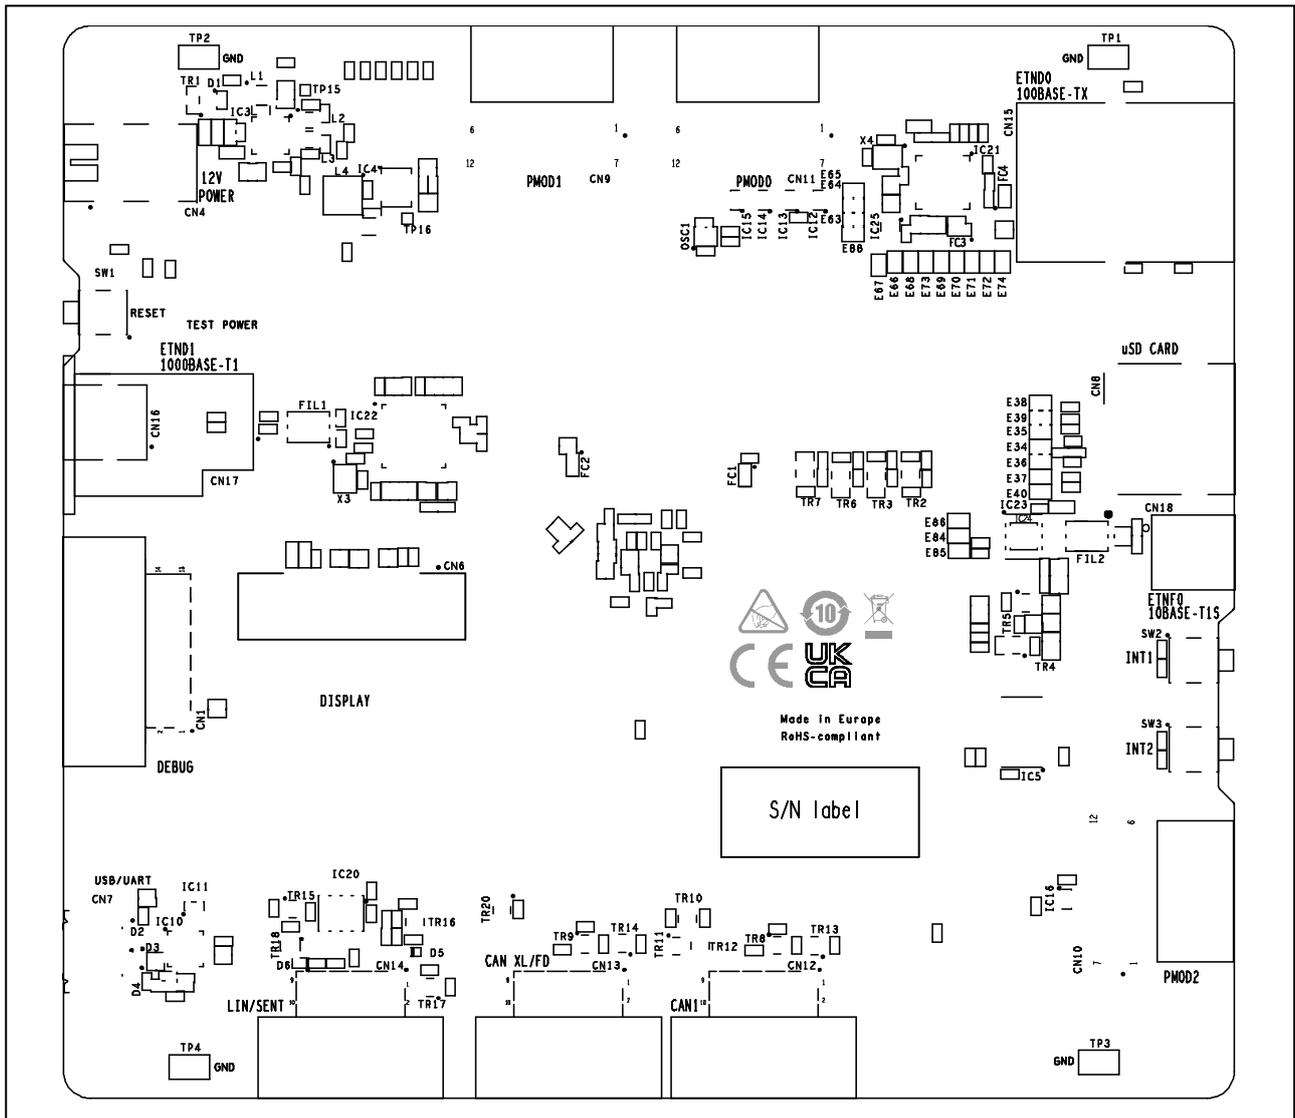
Placement of connectors on bottom side of the starter kit for board version D020925_06_V0200
